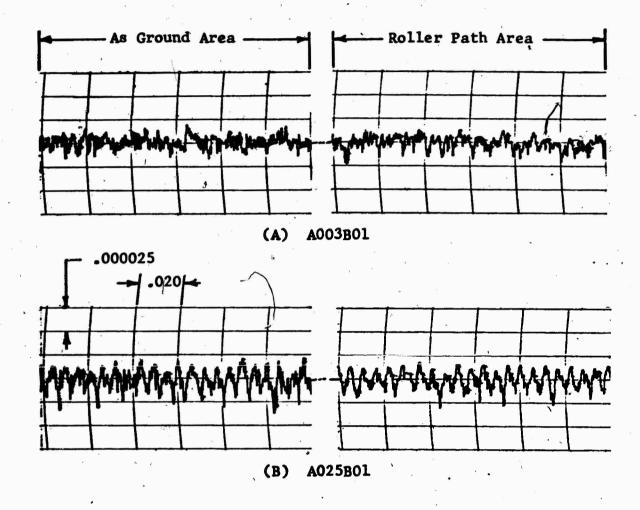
Variation in Surface Finish on Roller Bearing Inner Rings (P/N 114D3240-2).
